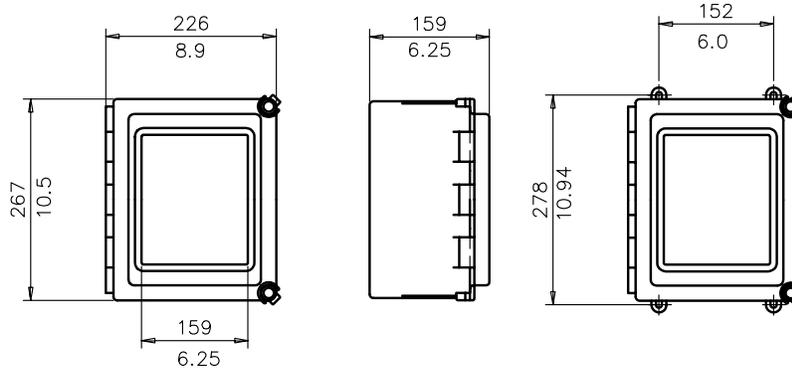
Indicating transmitter: Dimensions (mm/in) and mounting feet measures.
